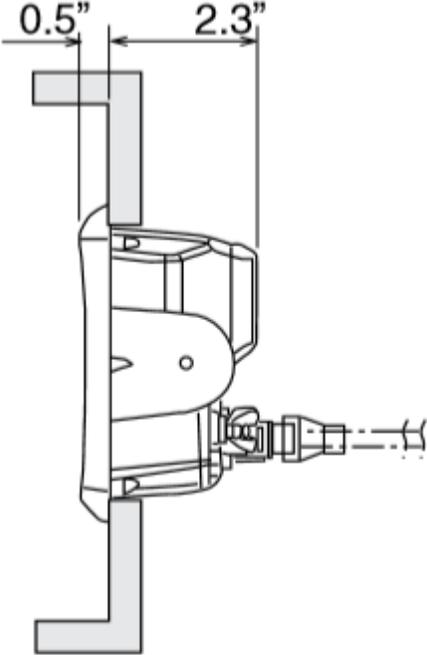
RD-33 FLUSHMOUNT SIDE VIEW
